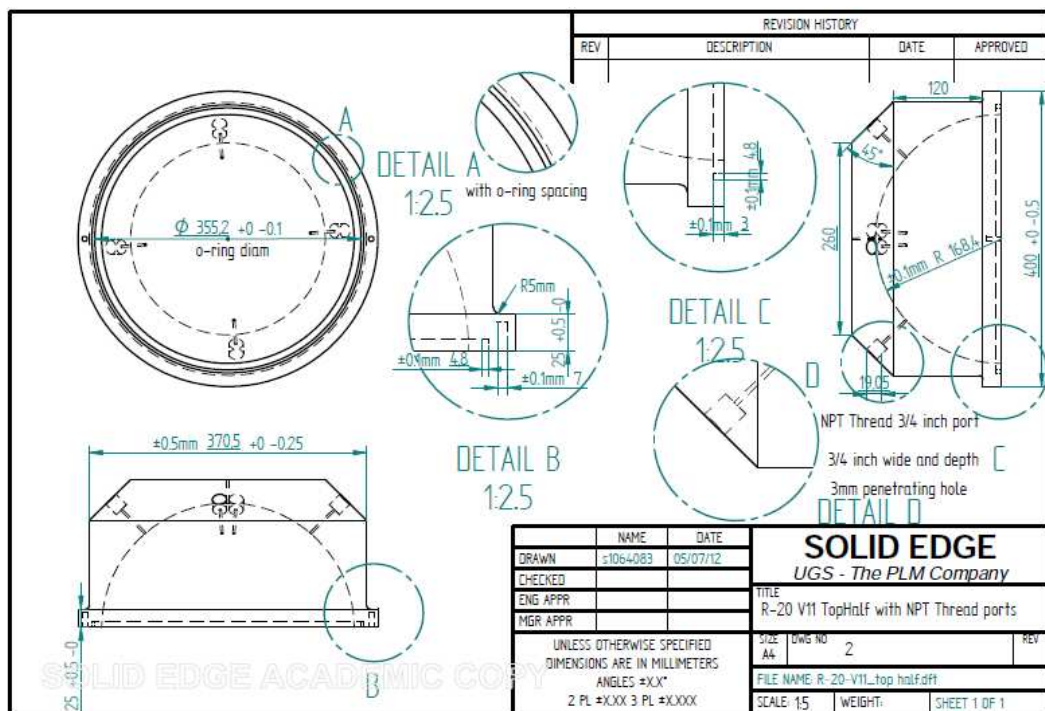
Detailed drawing of final design for half of R-20 ignition chamber with dimensions in mm.
